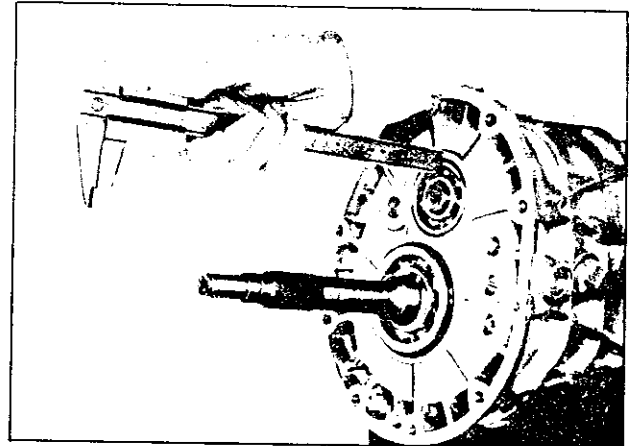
Selection main drive bearing spacer (Measuring depth "B")
